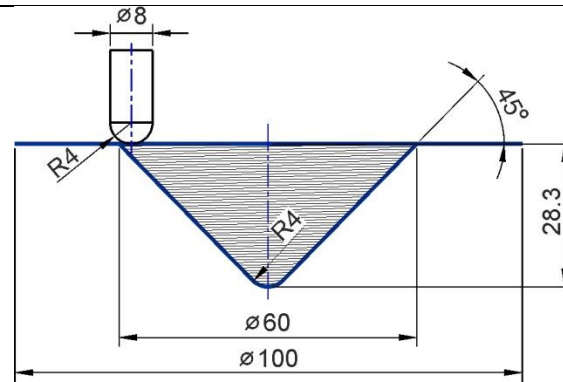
Geometry and dimensions (in mm) of the tool and the drawpiece.
